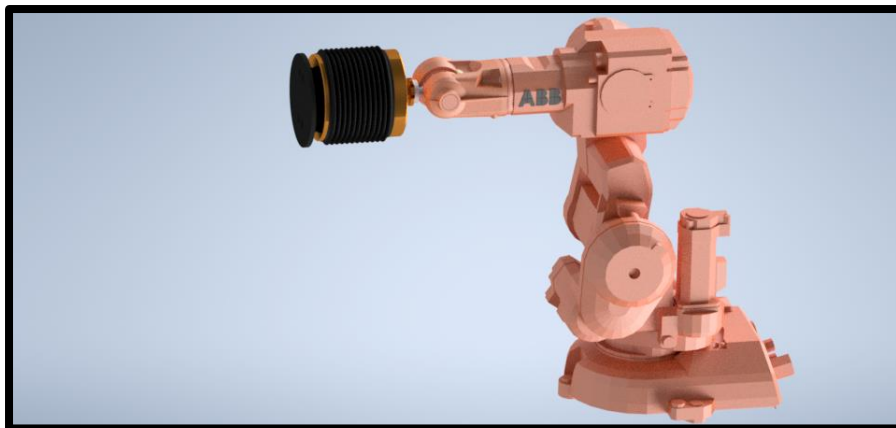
Assembly of the *ABB IRB 140* robot.
